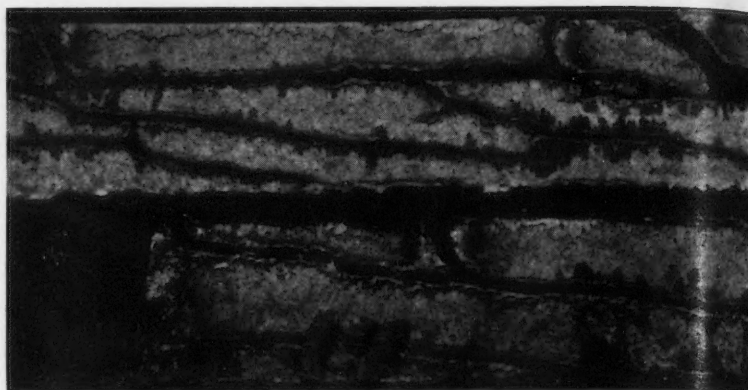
A—Edge view of spot welded samples with sheared edge attack. 25X.
